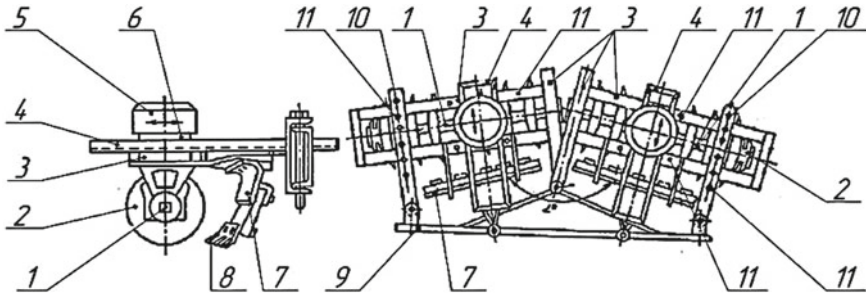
Ice breakers machine with disc cutters: 1—horizontal axis; 2—disc cutters; 3—bracket; 4—frame; 5—vibrator; 6—weights; 7—blade; 8—cutting prongs; 9—additional frames; 10—holes for changing the angle between the axes; and 11—fixing holes
